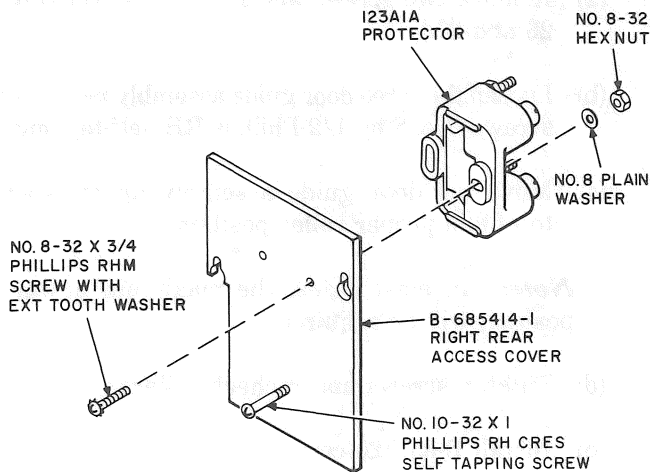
Assembly of 123A1A Protector on Right Rear Access Cover
